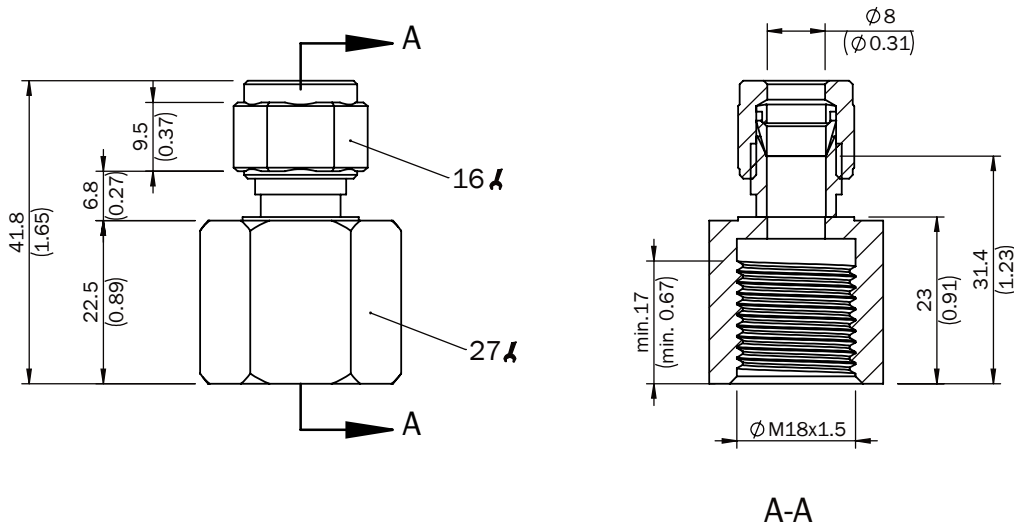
Dimensional drawing for M18 x 1.5 adapter (P/N 2104208)
